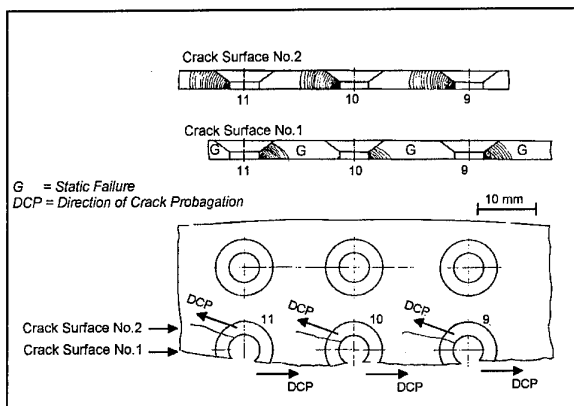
Fatigue Cracks in the Right Hand Side Panel No.7/9
